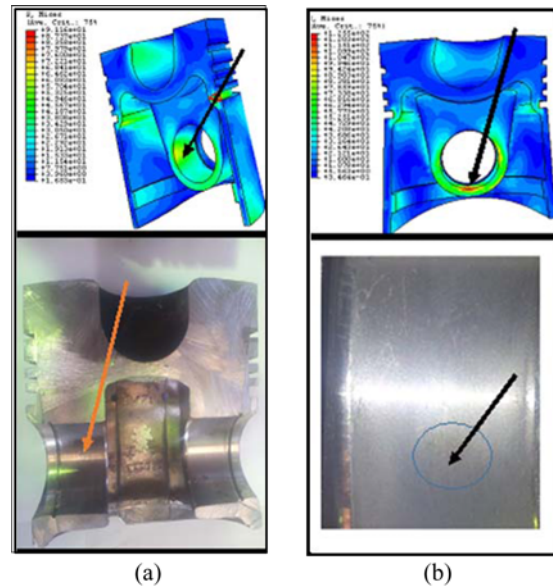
Arbor hole: (a) Damage due to the contact forces with the axis; (b) Scorching.
